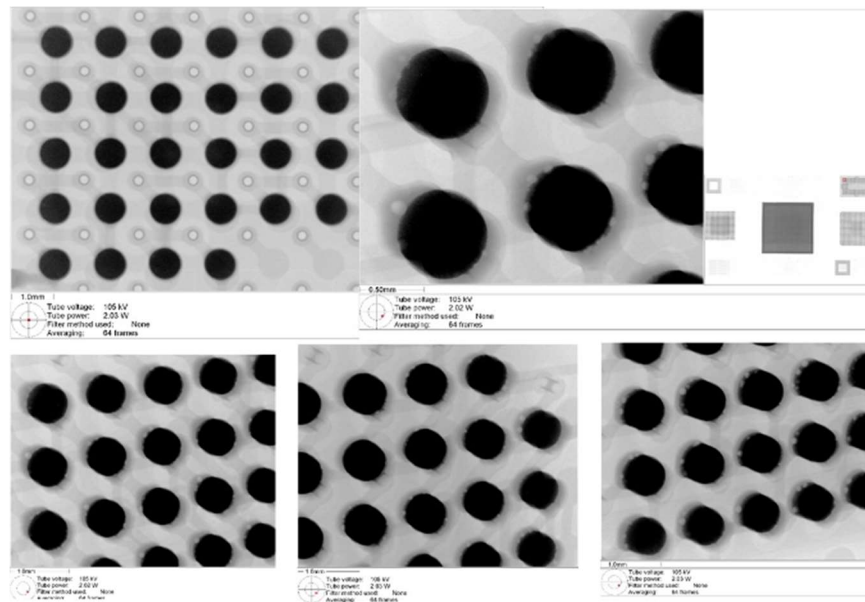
The image shows the overall 3D stack package assembly with an enlarged image showing more detail of the solder joint interconnections. Two solid solders, one with original un-melted solder balls attached to package and the other with melted solder paste forming solid solder disks attached to PCB.
